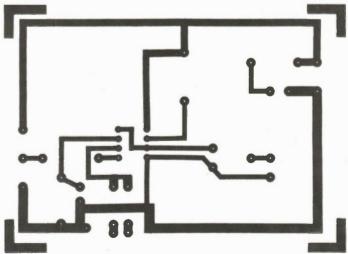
, the component overlay for the frequency measurement/tachometer unit and the PCB.
